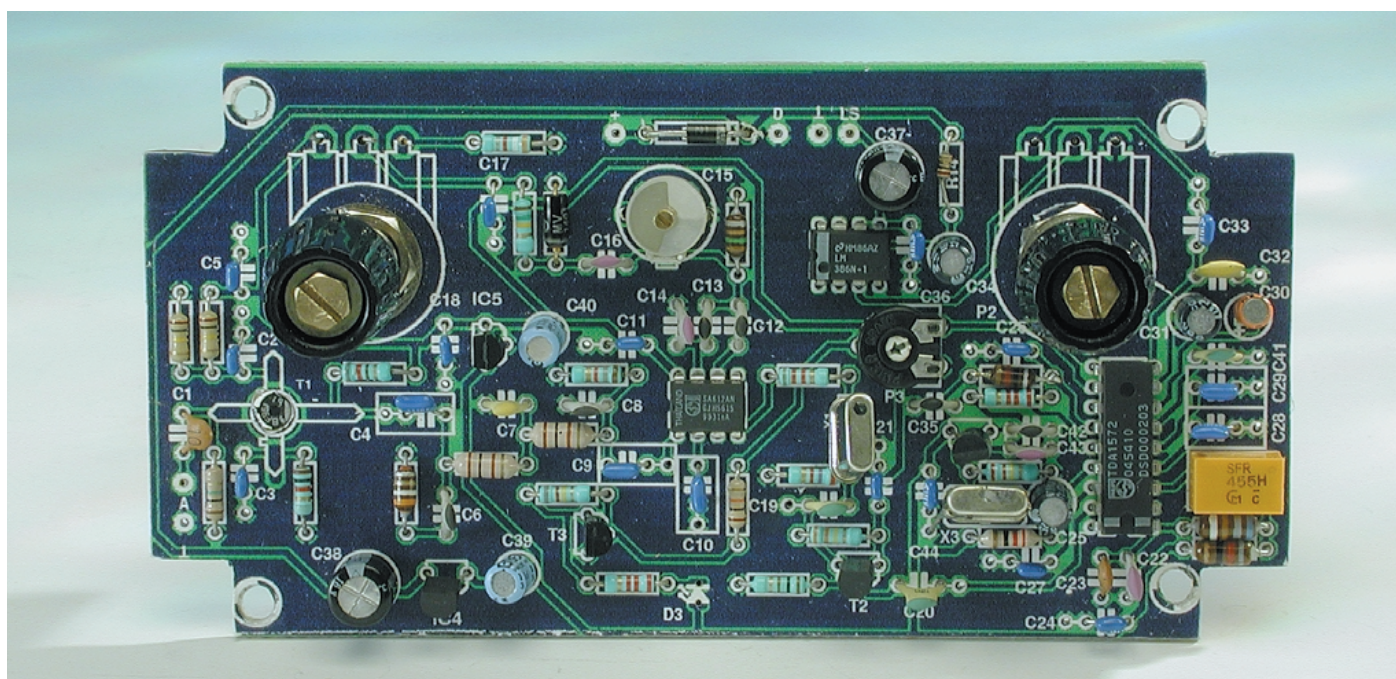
The cleverly designed PCB layout makes construction a simple task.
